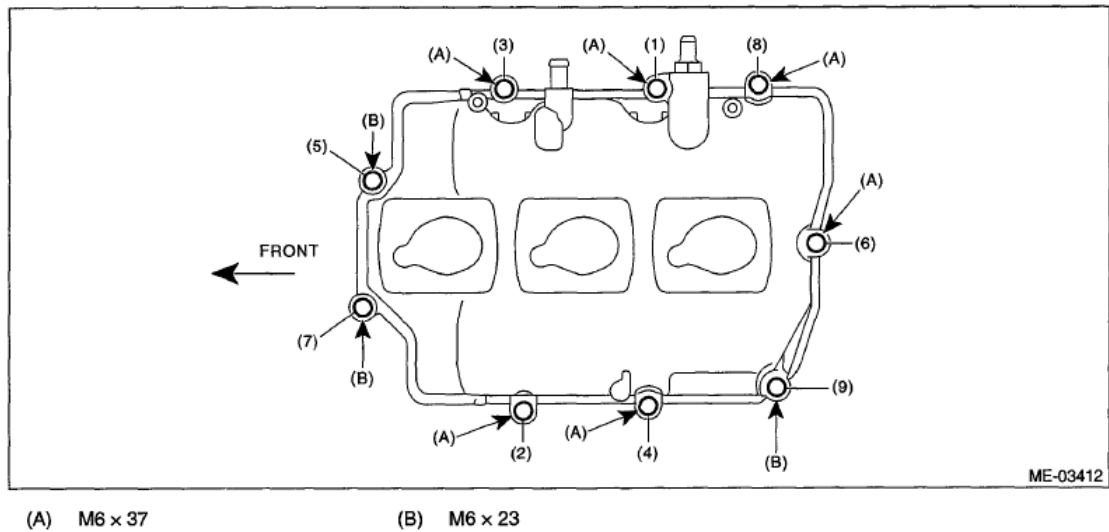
Identifying Rocker Cover Bolts Tighten Sequence (LH Side)
